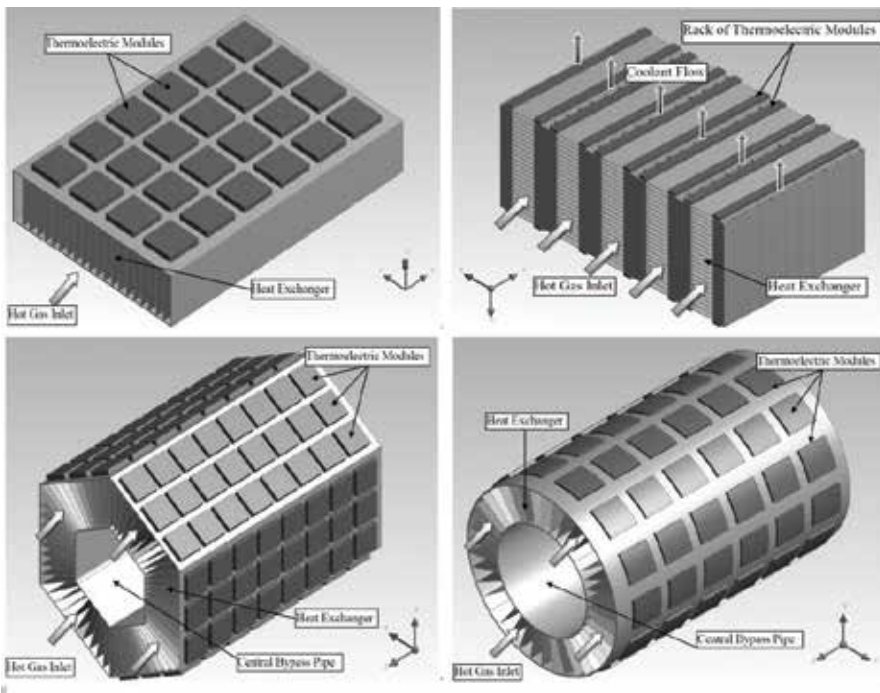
Various Heat exchanger structures for exhaust pipe adjustment.
